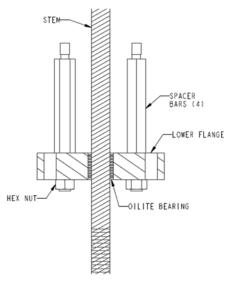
GB50/53 SERIES ACTUATOR OPTIONAL SPACERBAR ASSEMBLY
